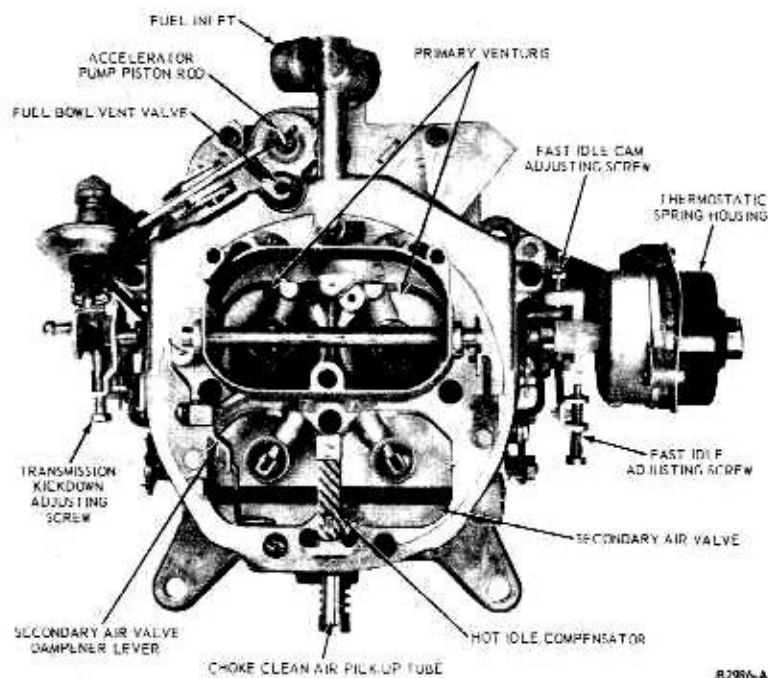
Autolite Model 4300 4-V Carburetor—Top View
